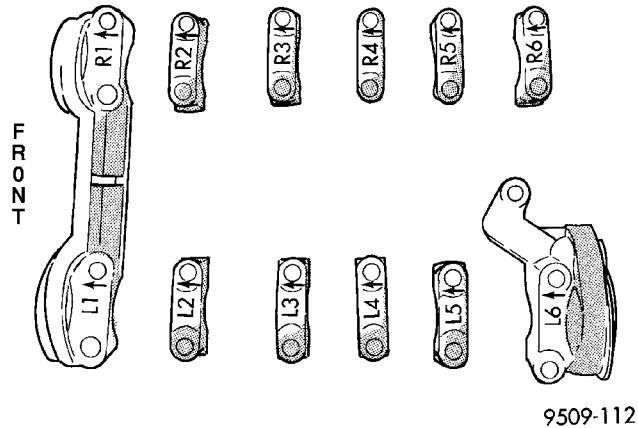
CAMSHAFT BEARING CAP IDENTIFICATION
